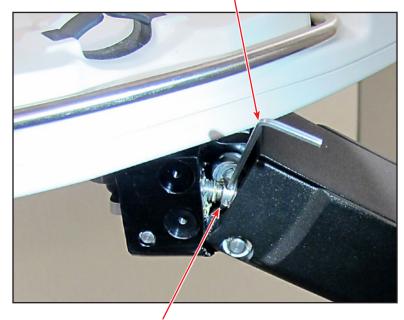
Washers and Bearings used to attach Tray Assembly to the Tray Arm
